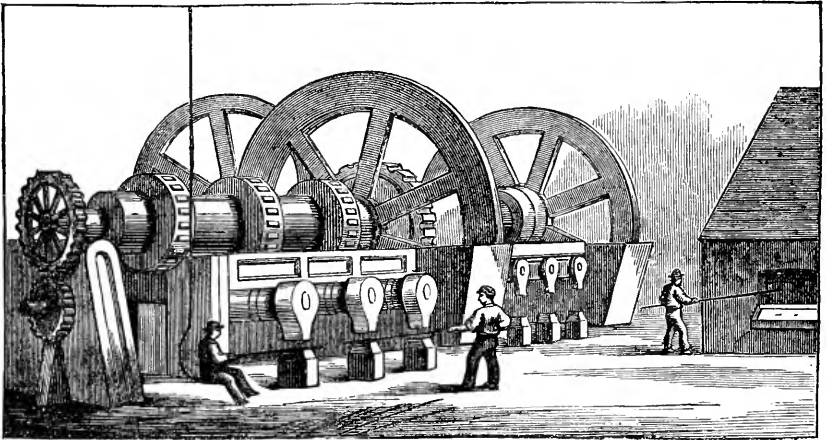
OLD STYLE OF STEEL "TILTING-HAMMERS."
